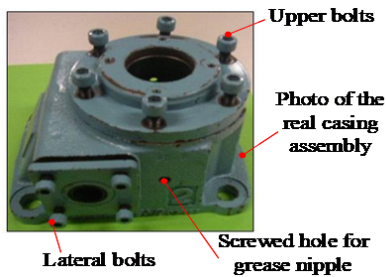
Photo of the real casing assembly, consisted of the actual case, and three types of covers, which are fixed with bolts on the case
